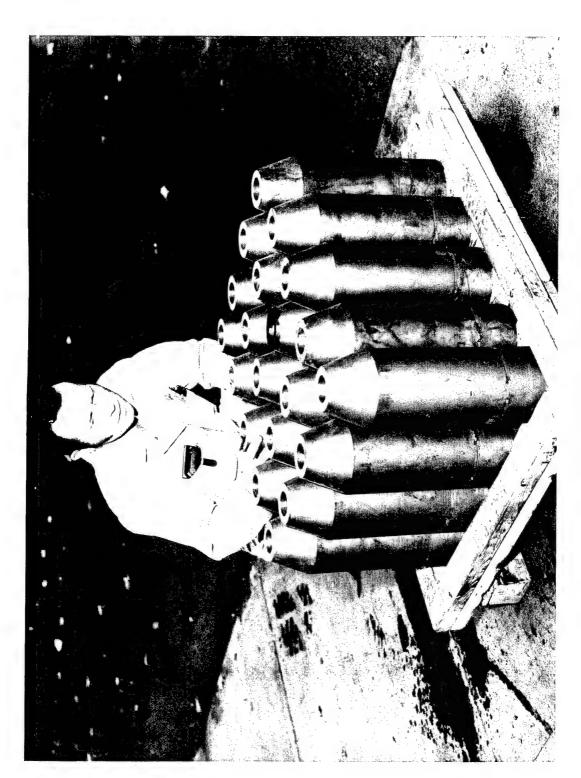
COATED HYDRAFILM EXTRUSION BILLETS
